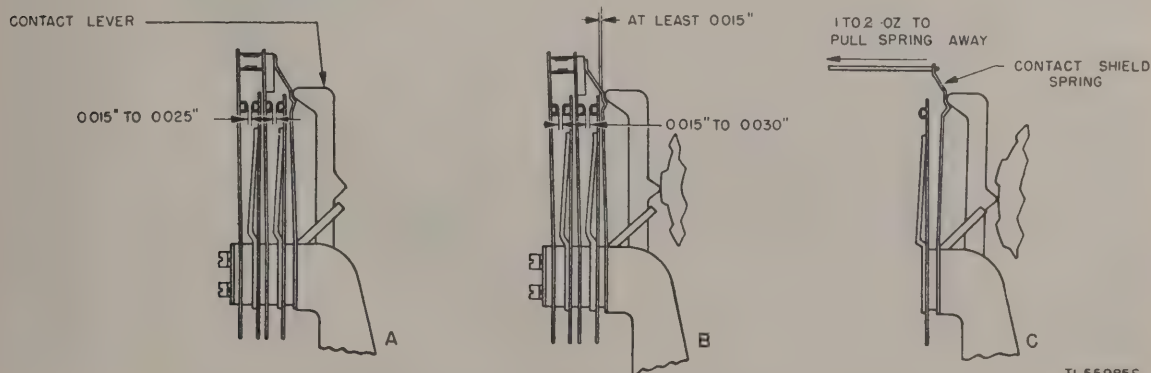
Distortion Test Set TS-383/GG, transmitting contact requirements.
